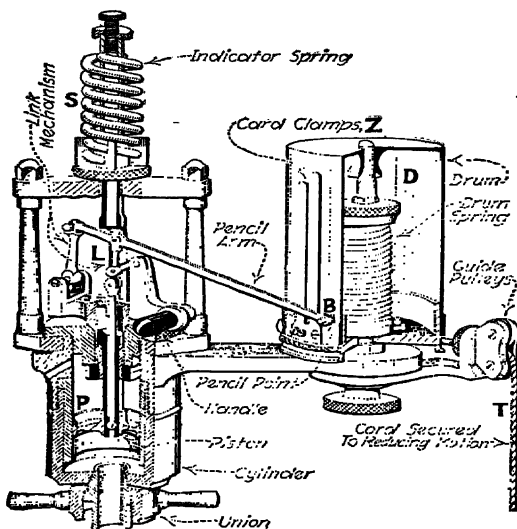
Semi-sectional view of Crosby outside-spring steam-engine indicator.
